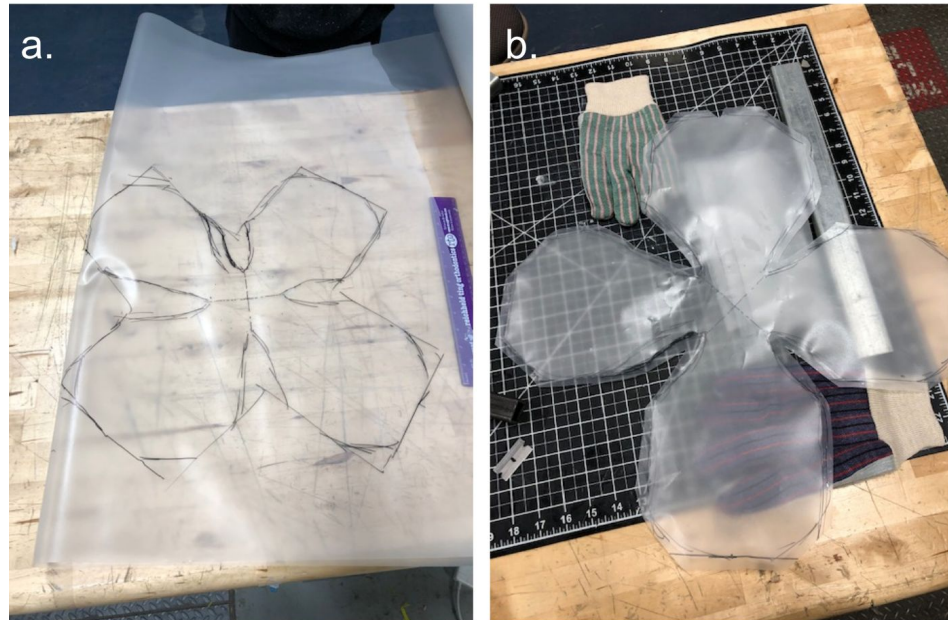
air pocket made using heat press. a) dimensions of air pockets drawn out on double layered plastic film. b) air pockets after being cut out and heat pressed to seal edges of the perimeter.
